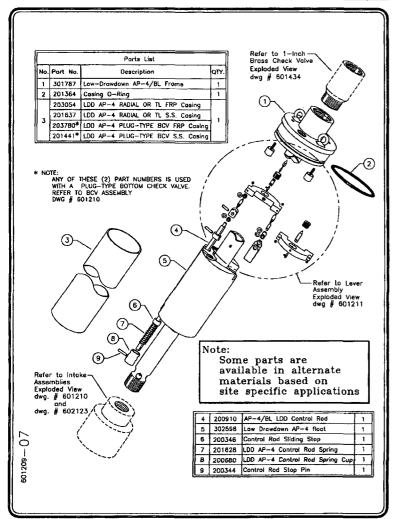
Exploded View of LDD Bottom-Loading AutoPump AP-4
